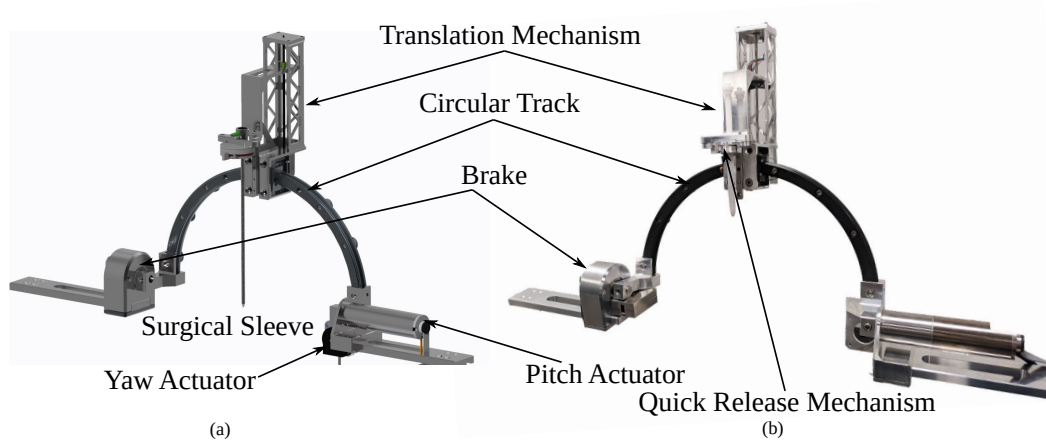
(a) CAD Model of circular motion system (b) Actual circular motion mechanism
